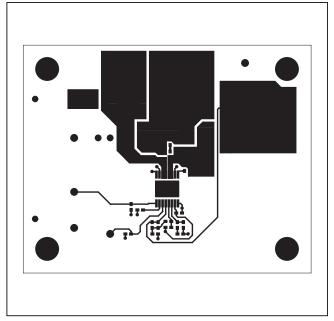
MAX16909 EV Kit PCB Layout—Component Side
